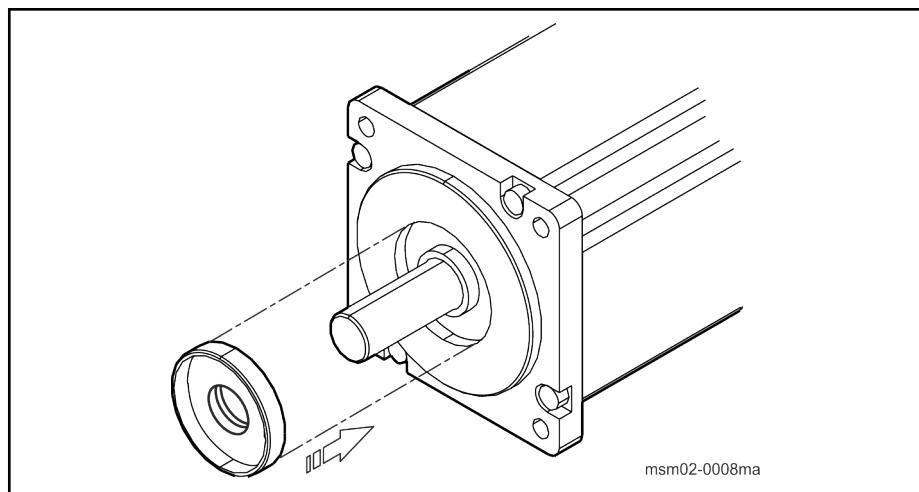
Mounting accessories radial shaft sealing ring MSM
